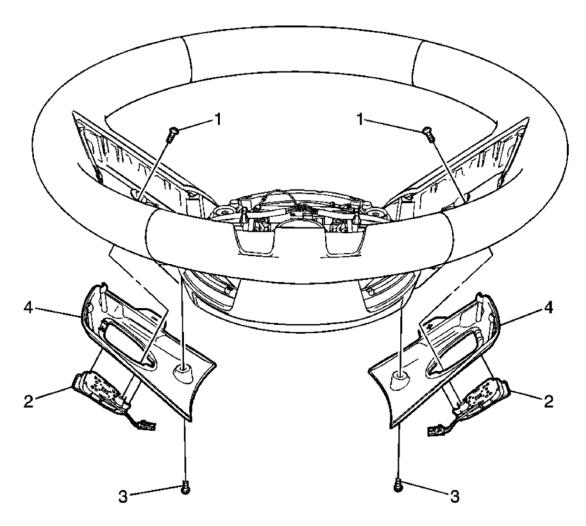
Manual Shift Auxiliary Position Switch - Steering Wheel Courtesy of GENERAL MOTORS CORP.
